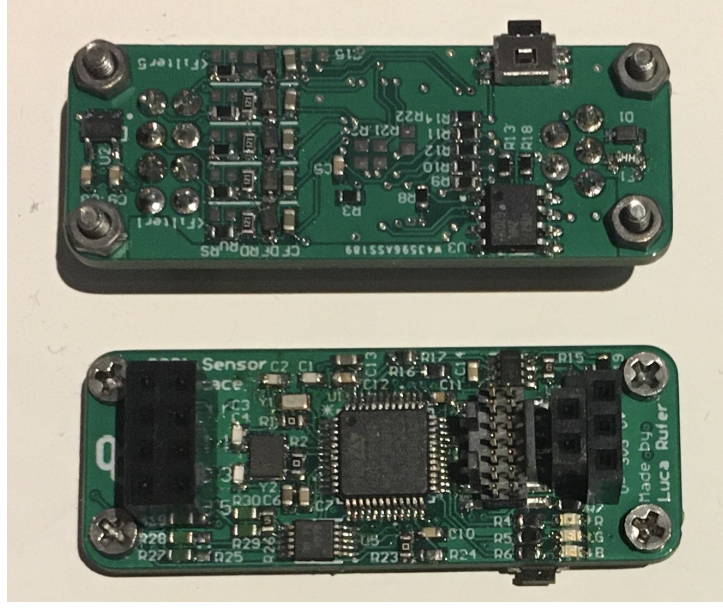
Fully Assembled Prototypes of the Adapter PCB
